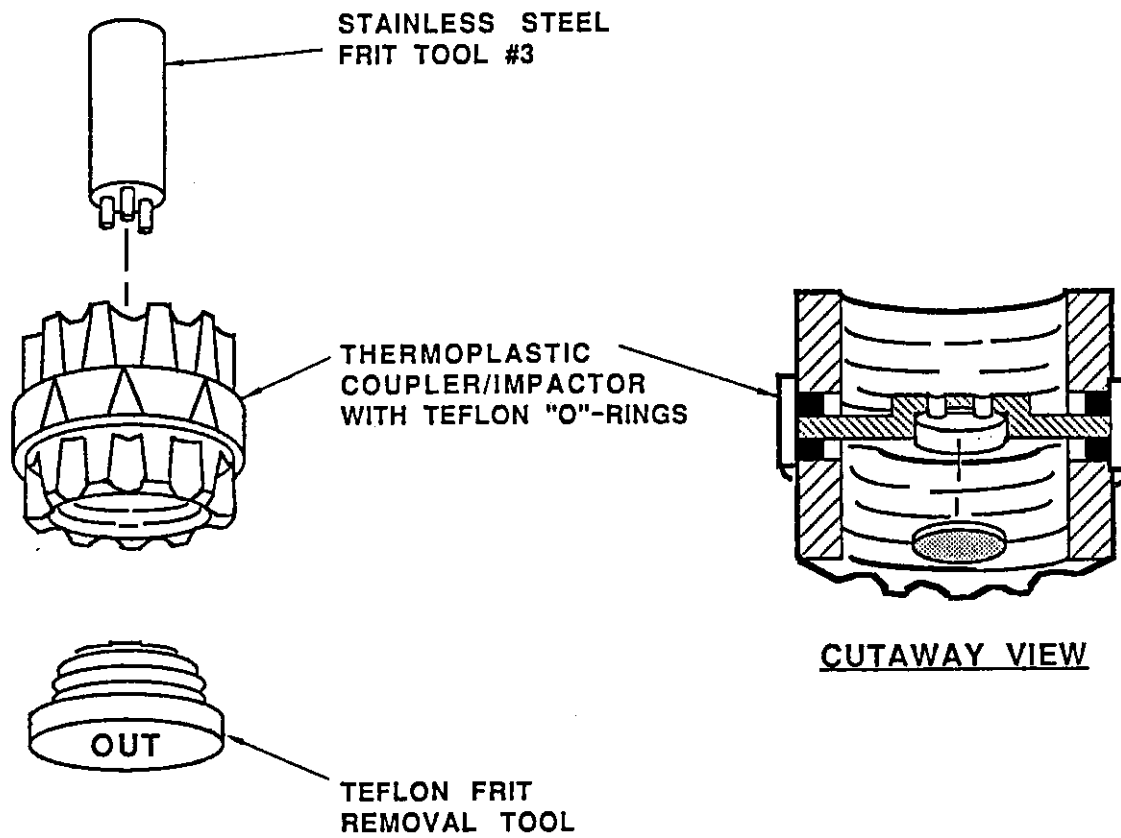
Side View Impactor/Coupler Assembly with Disc Removal Tools
